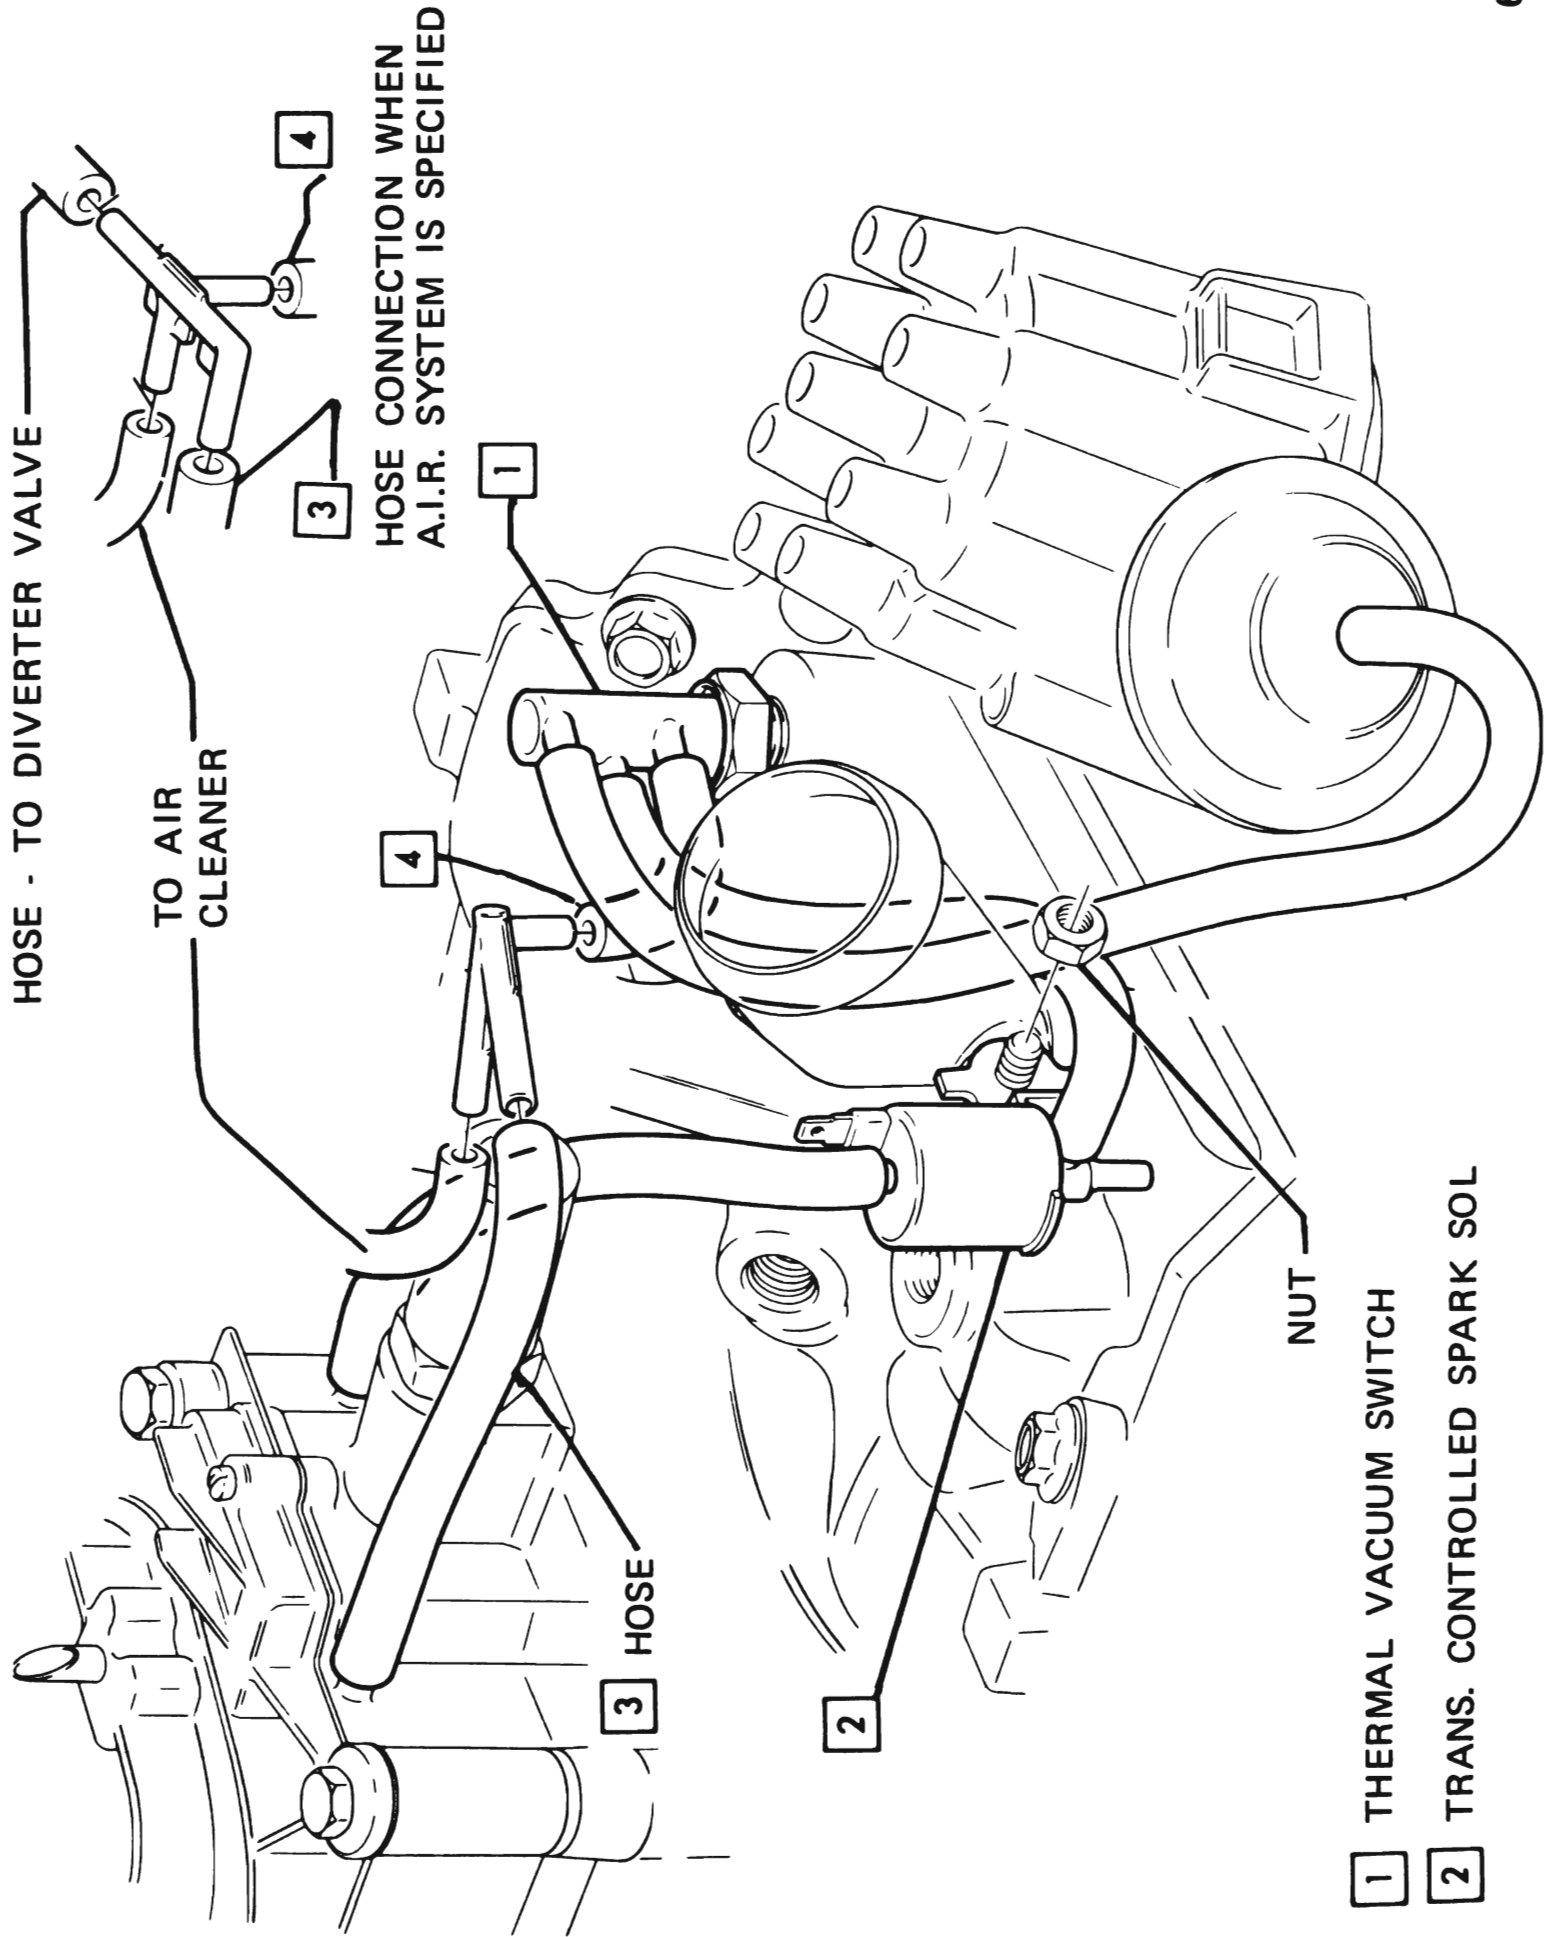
Vacuum Tube Routing - 350 4-BBL - 4G Series With A/C
